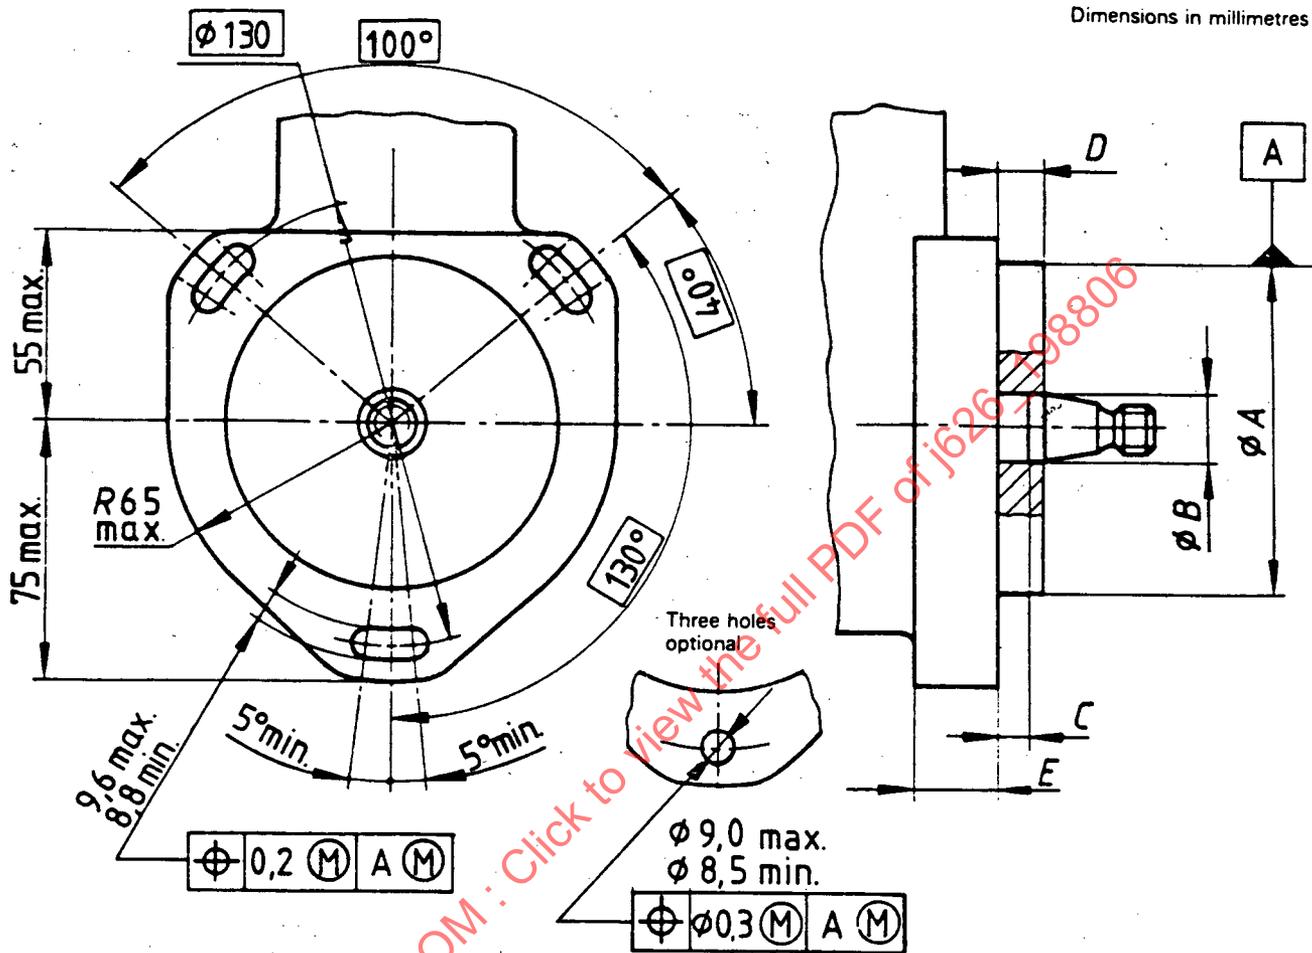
Fuel Injection Pumps - Type 6 End-Mounting Flange
